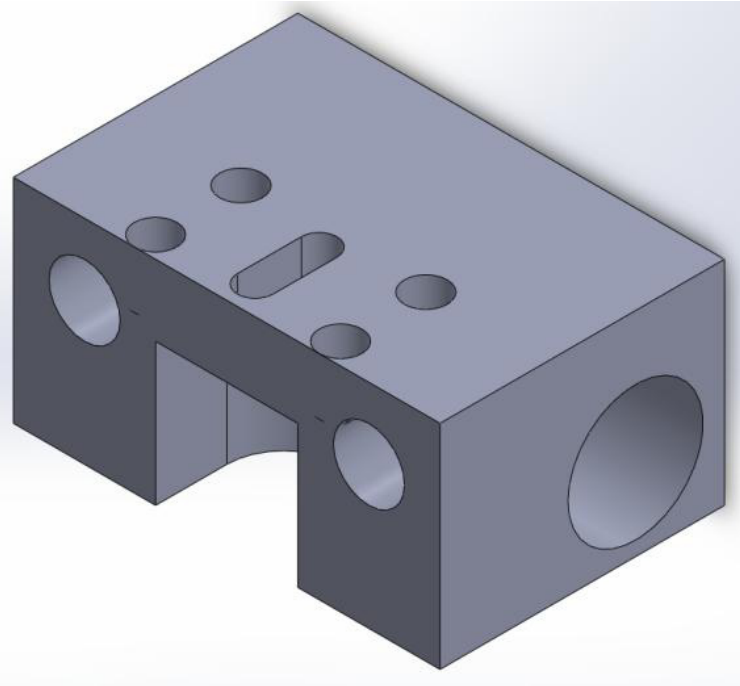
'Endplate Pulley v1'. This is the pulley mount for the moving motor.
